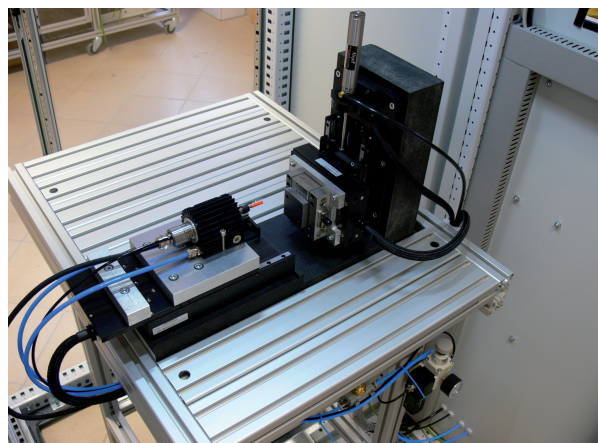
The SNTM-CM-ZUT-1 micromilling machine
